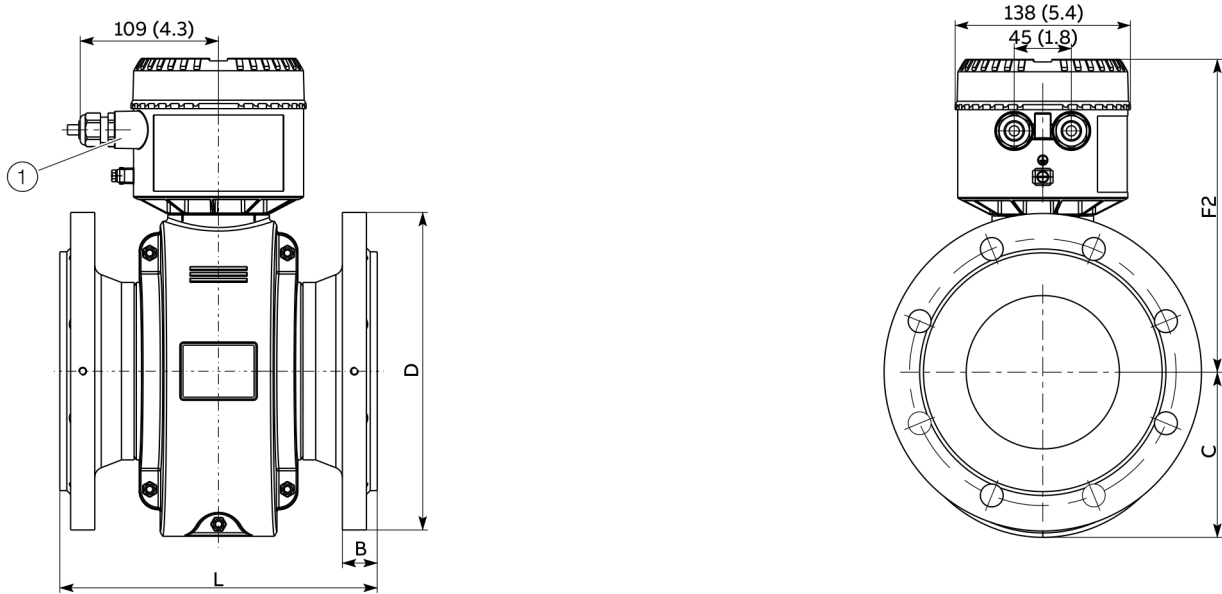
Flowmeter sensor with carbon steel flange and stainless steel flange, nominal diameter DN 25 to 400 (3/4 to 16 in), high pressure design
